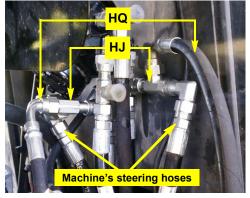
Steering run-tees installed and steering hoses connected/reconnected
